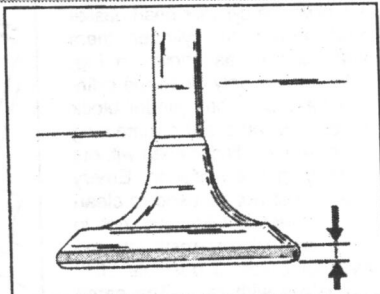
The valve head head is measured between the arrows. Make sure to observe the minimum permissible dimension.
